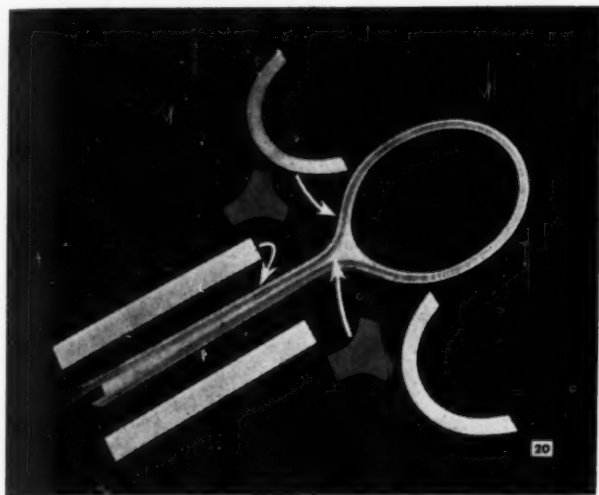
COMPLETELY ASSEMBLED FRAME AFTER BENDING OPERATION SHOWING HANDLE FLAKES, FIBER FACES, AND KRO-BAT OVERLAYS, WHICH ARE APPLIED IN SUBSEQUENT SEPARATE OPERATIONS
